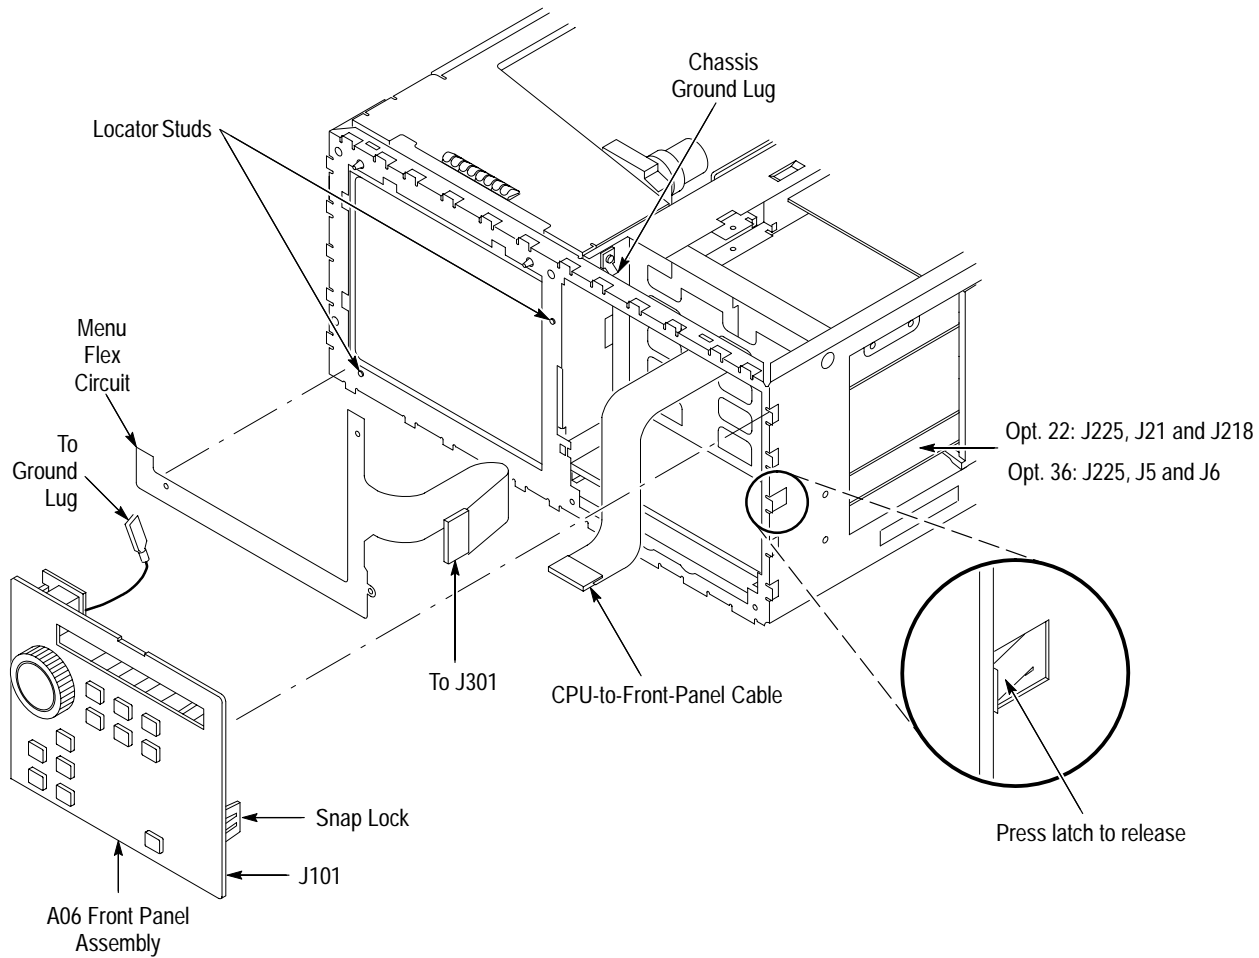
A06 Front Panel Assembly and Menu Flex Circuit Removal
